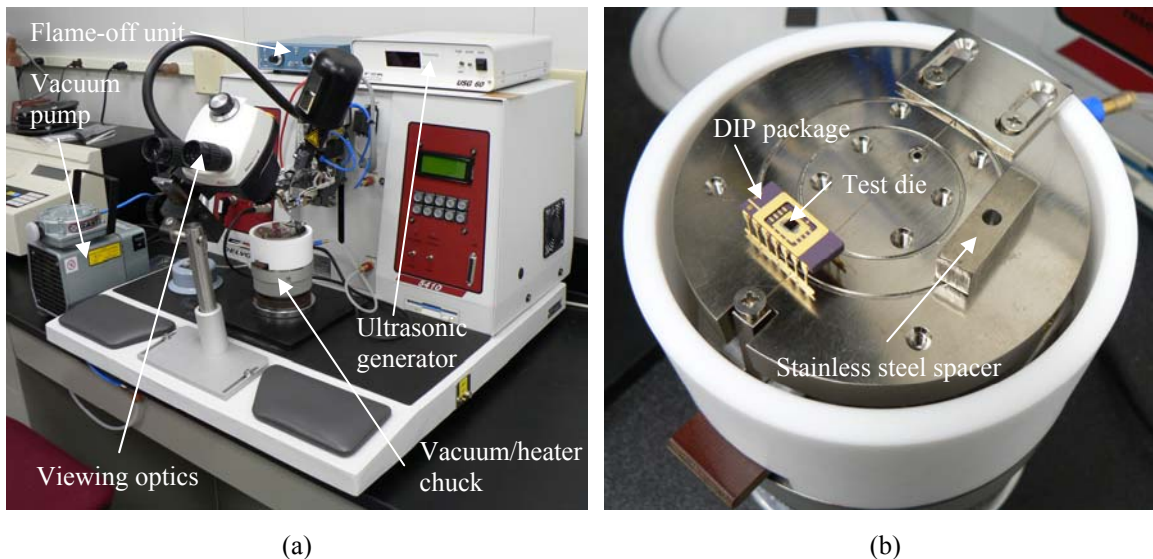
Picture of wire bonding setup and close-up of vacuum/heater chuck with stainless steel DIP spacer and sample DIP with test die.
